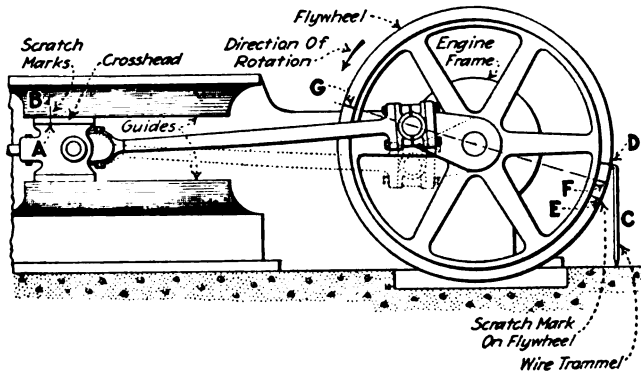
Illustrating method of finding the dead centers of an engine.
